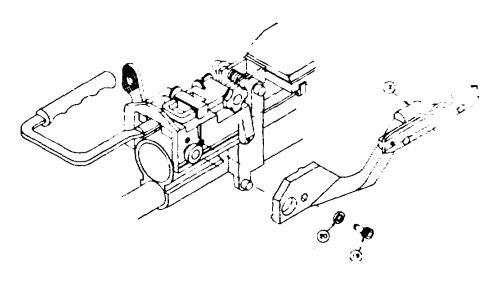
(2). Installation of M60 adapter assembly (sheet 2 of 4).
